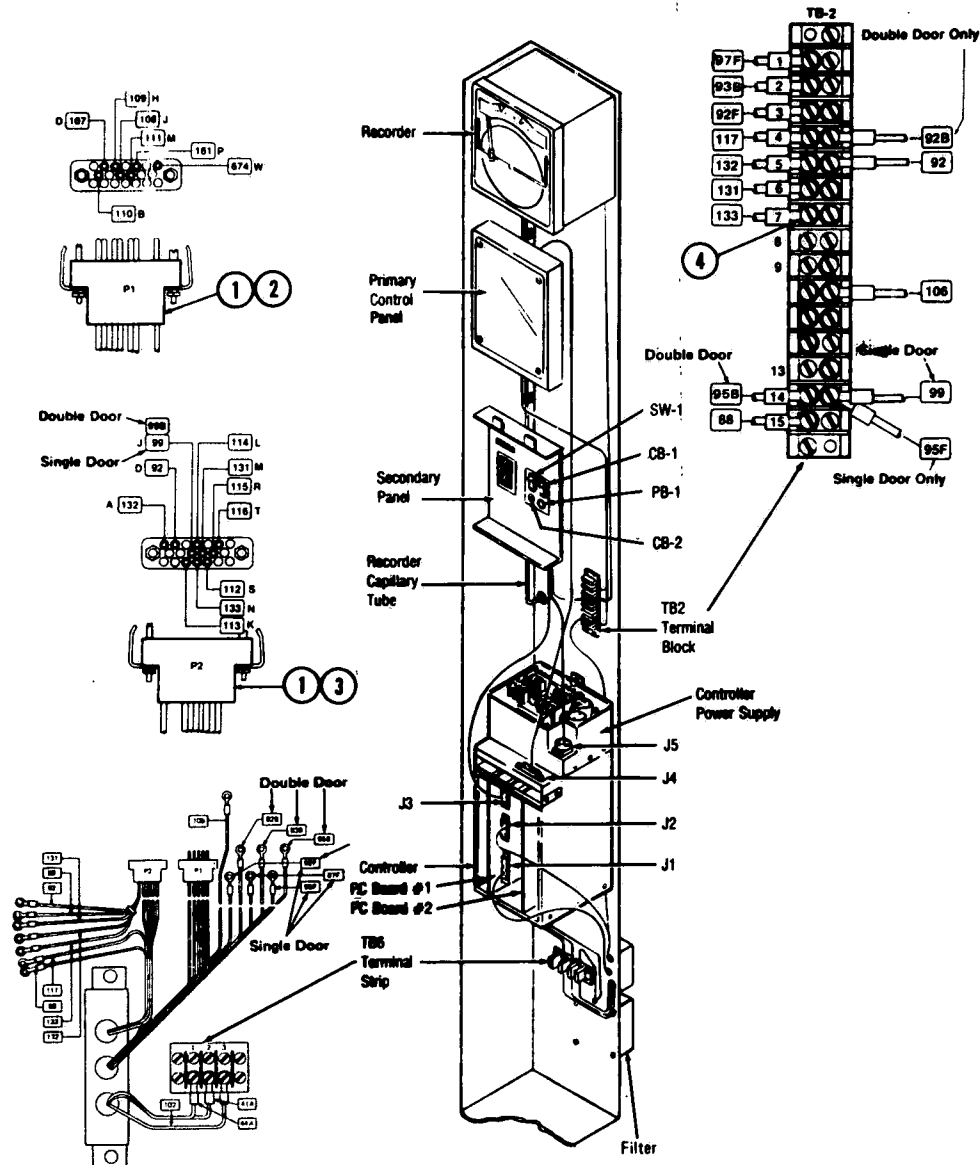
CONNECTION DETAILS: Control Column, Manual Door.
